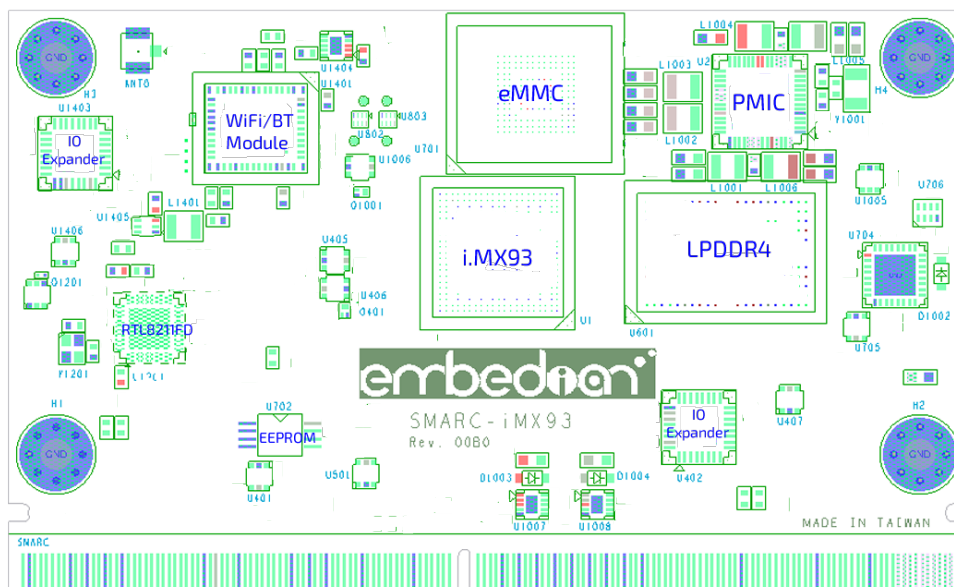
SMARC-iMX93 Mechanical Drawings (Bottom View)
